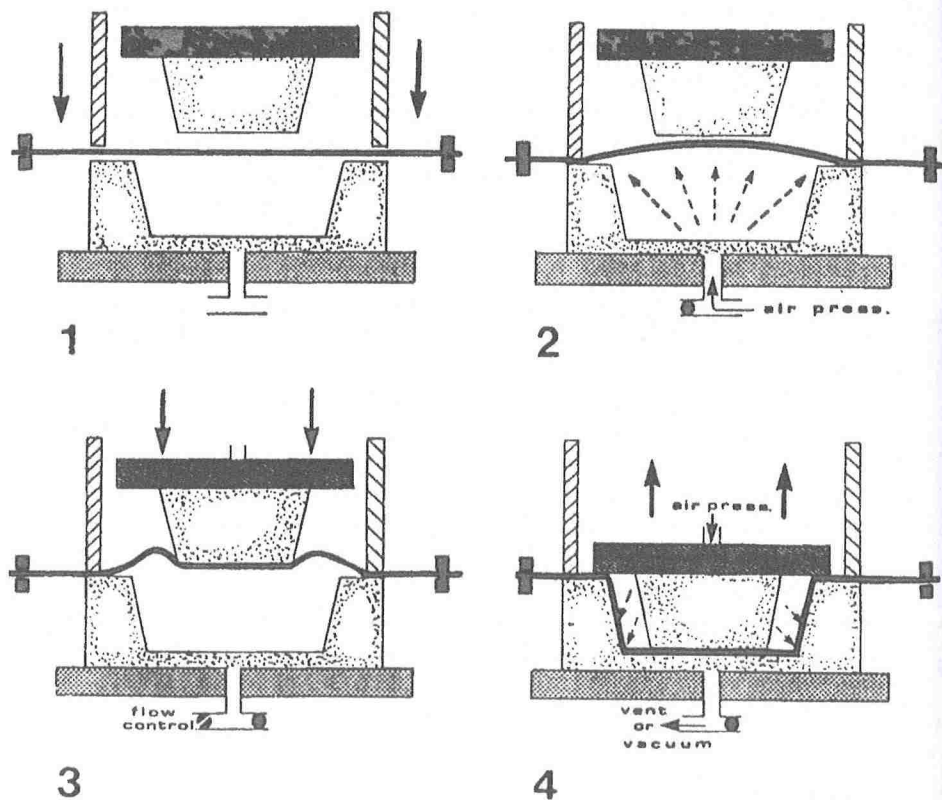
Pressure bubble plug-assist forming: (1) preheated sheet clamping; (2) prestretching of sheet; (3) mold closing; (4) pressure forming into female mold.
